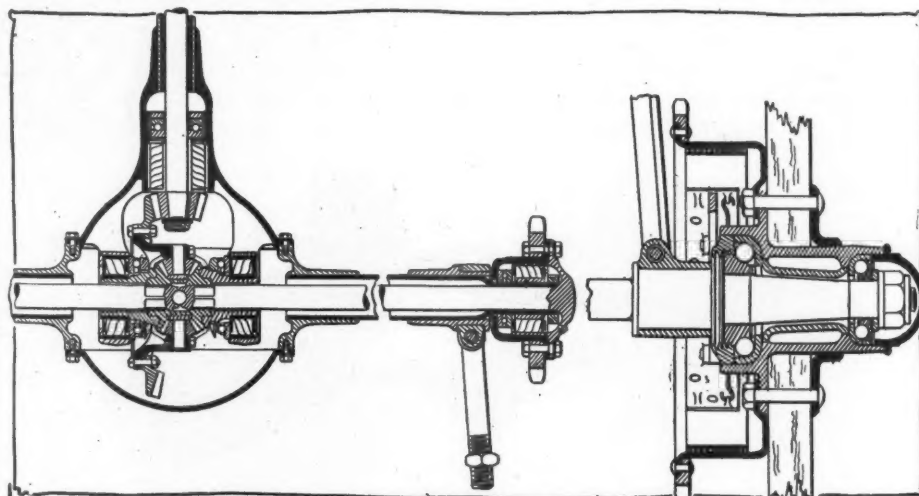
SECTION OF SHELDON JACKSHAFT AND REAR AXLE END
